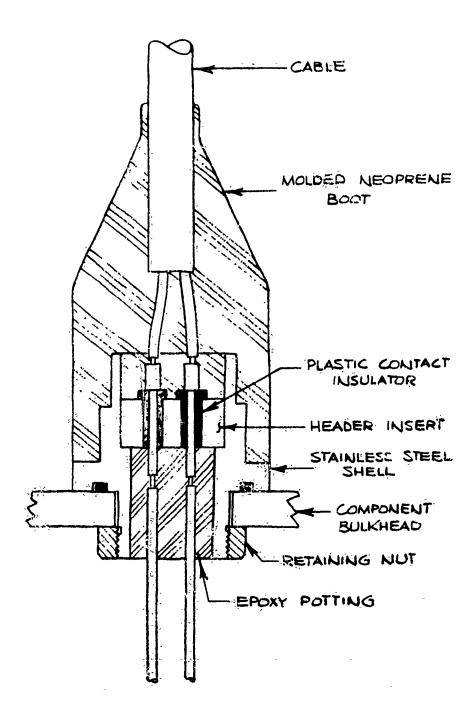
Molded Cable Penetrator with Insulated Backing Header Insert
